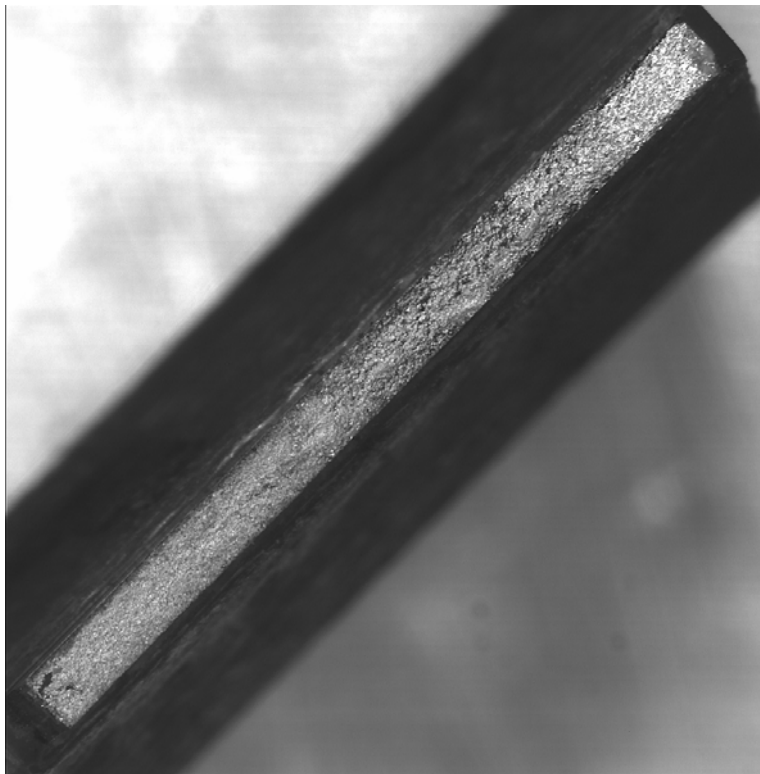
Fracture Surface of Specimen 0000.
